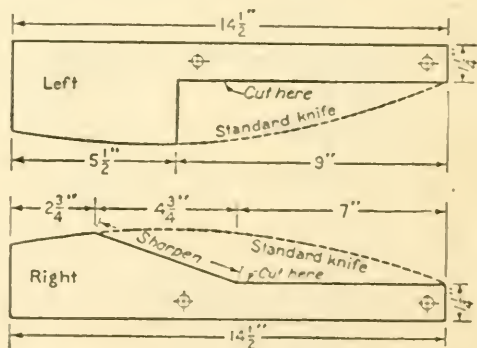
Side knives recut, McCormick-Deering corn binder
